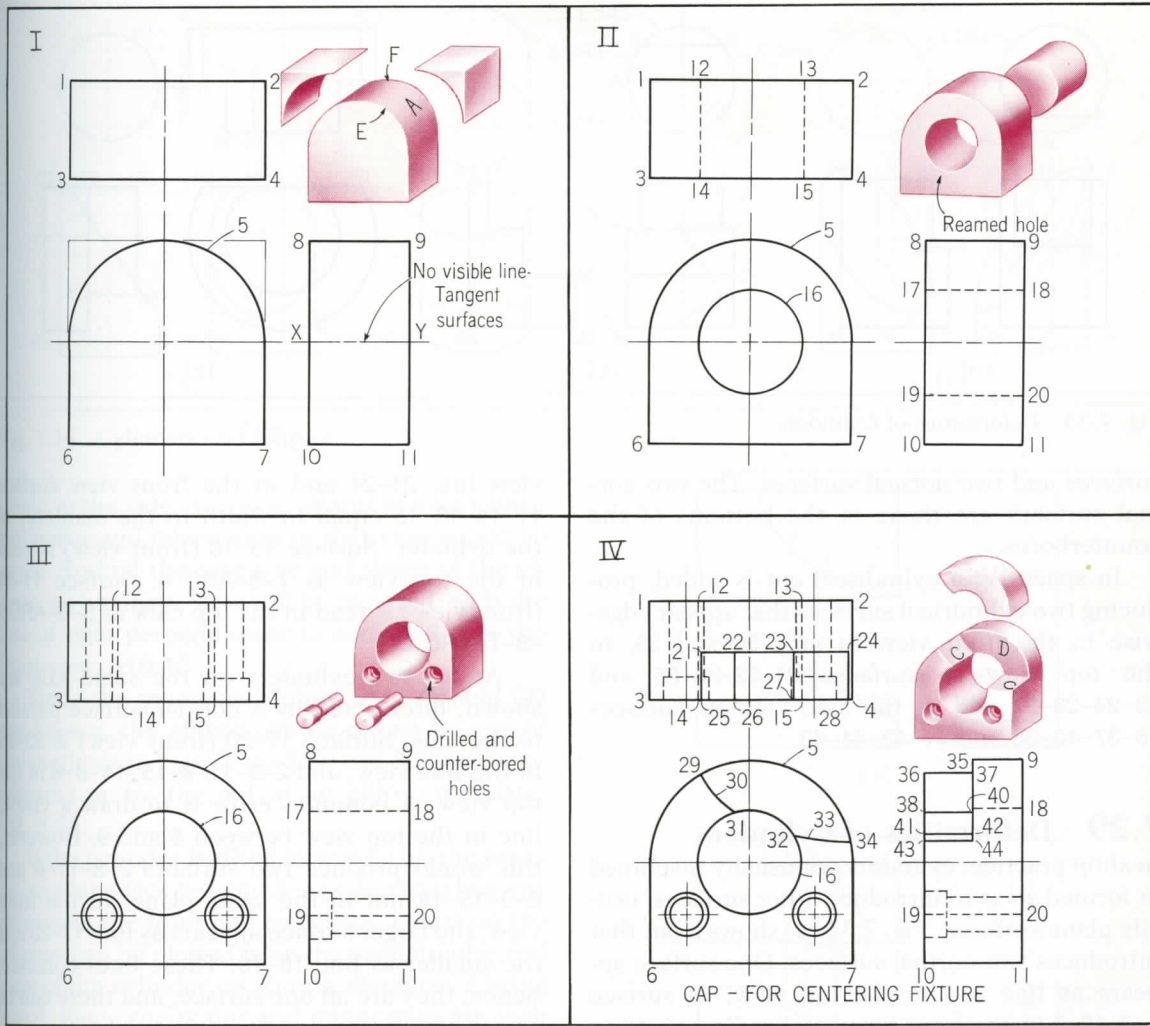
Machining a Cap—Cylindrical Surfaces.
